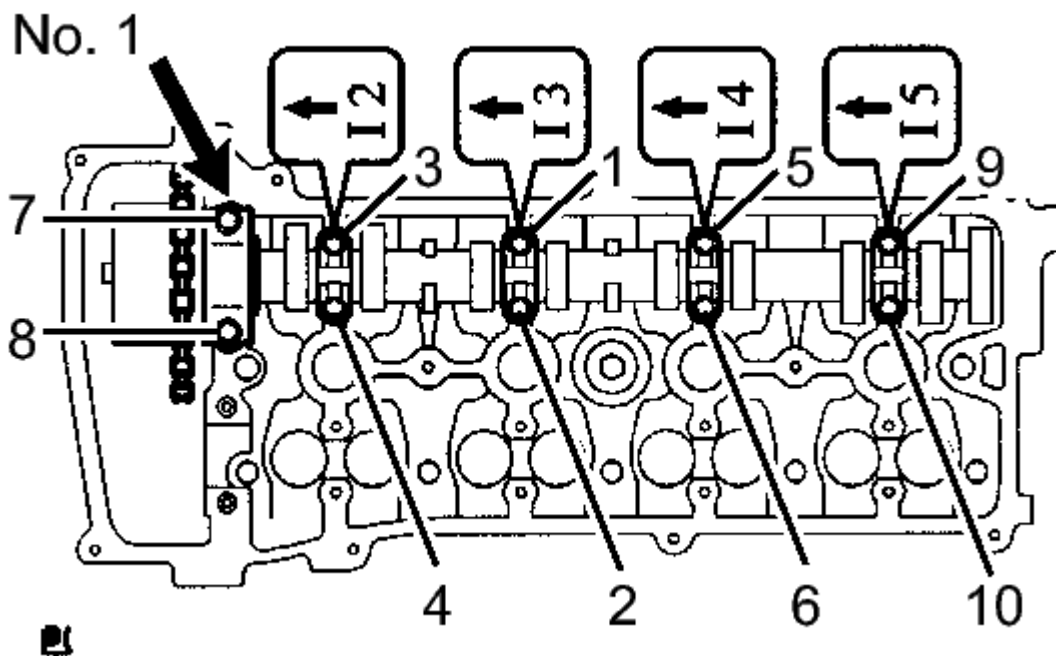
Tightening Bearing Cap Bolts In Sequence
